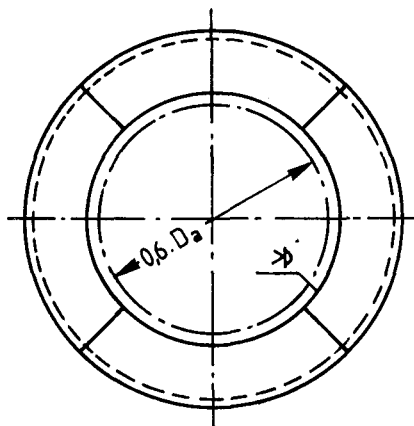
Welded dished end from crown and knuckle components inside  $0,6 D_a$   $v = 1,0$
